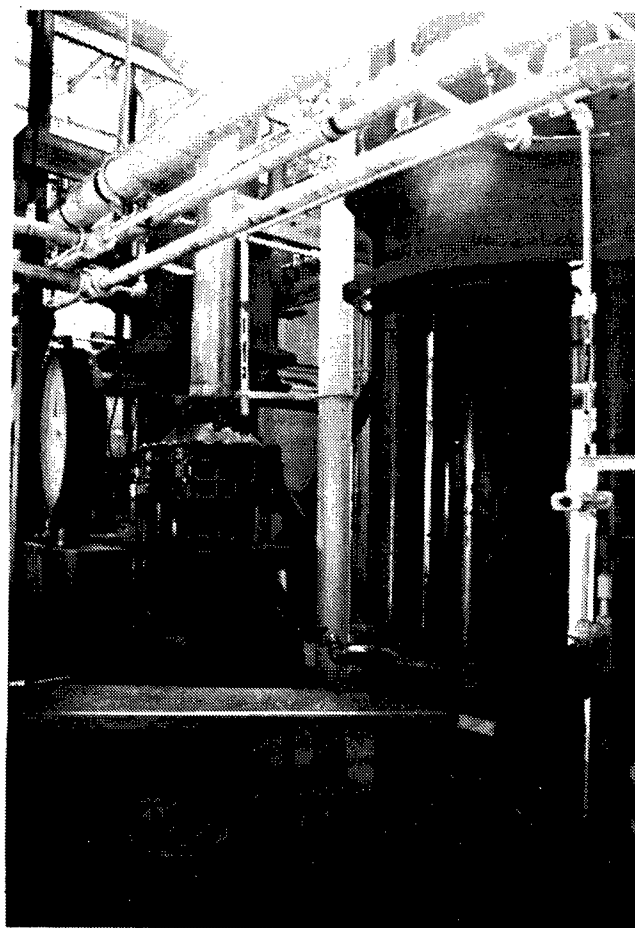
Building 1500: Dehydration vertical press manufactured by Wood on the first floor.
